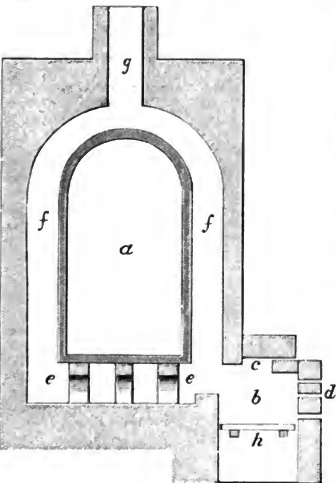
TRANSVERSE SECTION OF ENAMELLING KILN.
